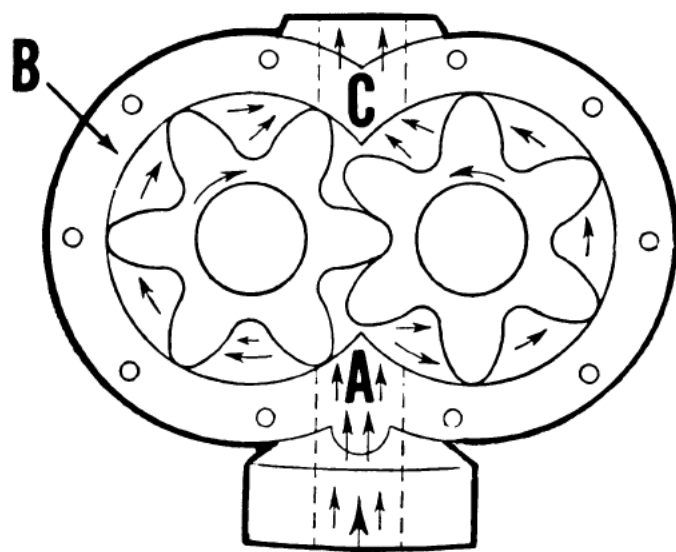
Rotary gear pump. A, suction; B, casing; C, discharge.
